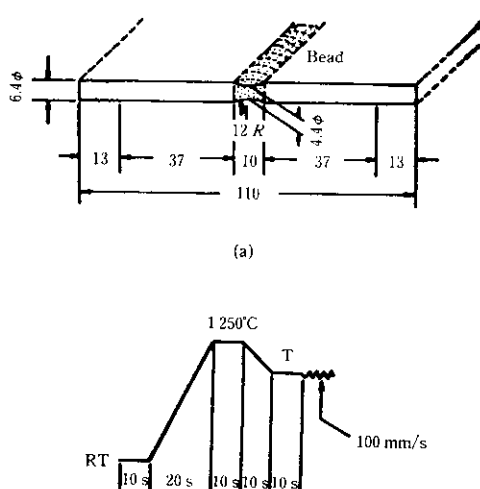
Shape and size of welded specimen (a) and heat cycle (b) in Gleeble type tension test after quick heating
